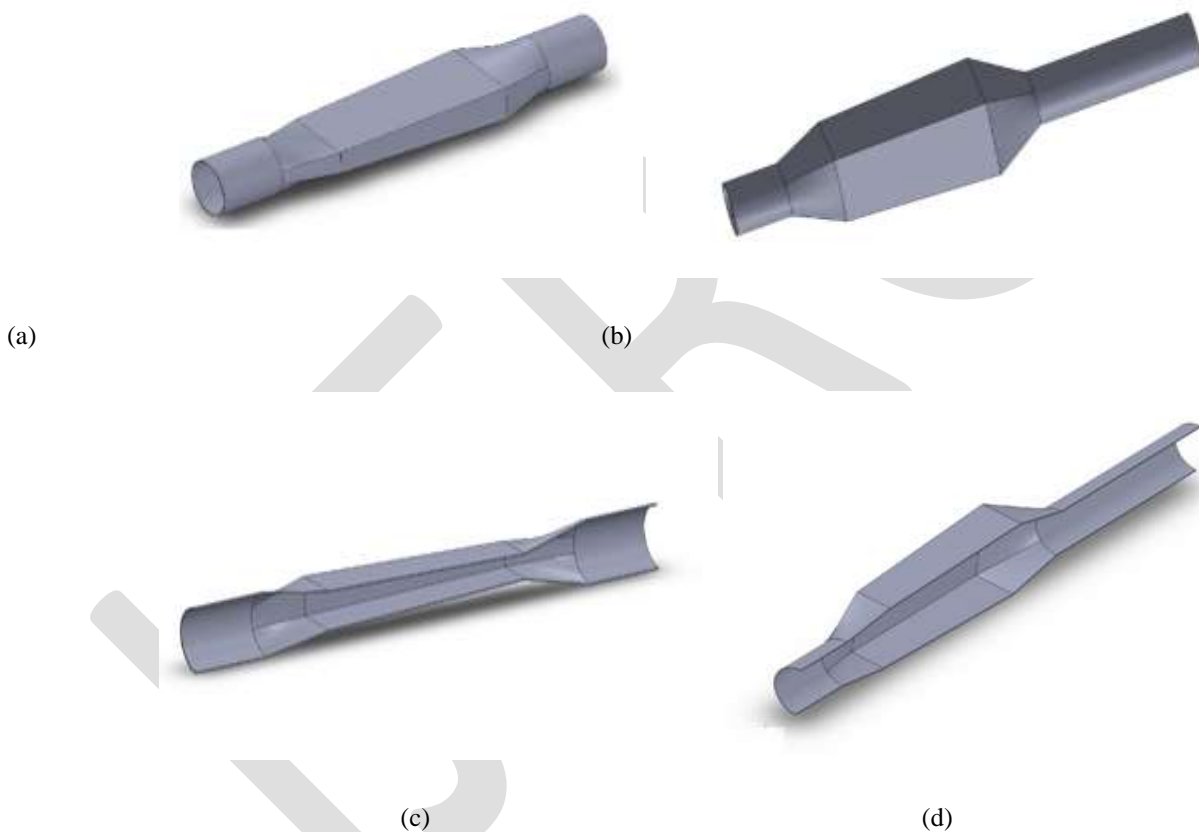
(a) three dimensional view of Rectangular heat exchanger (b) three dimensional view of Square heat exchanger (c) sectional view of Rectangular heat exchanger (d) sectional view of Square heat exchanger
